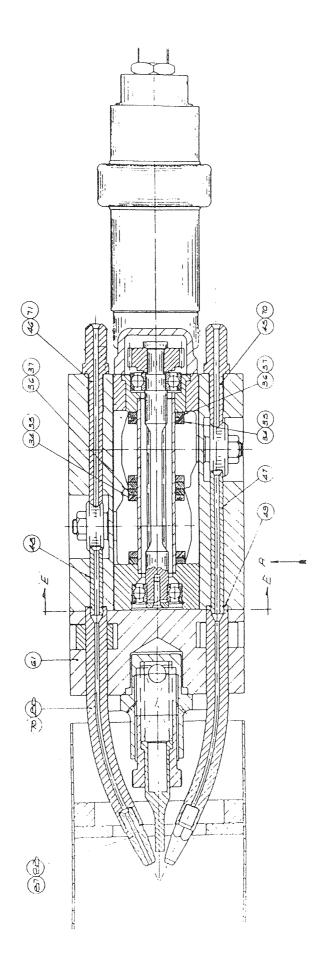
Horizontal section through Arc-spray 400 pistol. Note. Pitch of contact tubes 79 & 80 is 2.5 inches.
